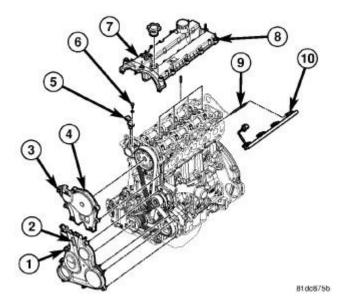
Upper Front Cover & Cylinder Head Cover Courtesy of CHRYSLER LLC
